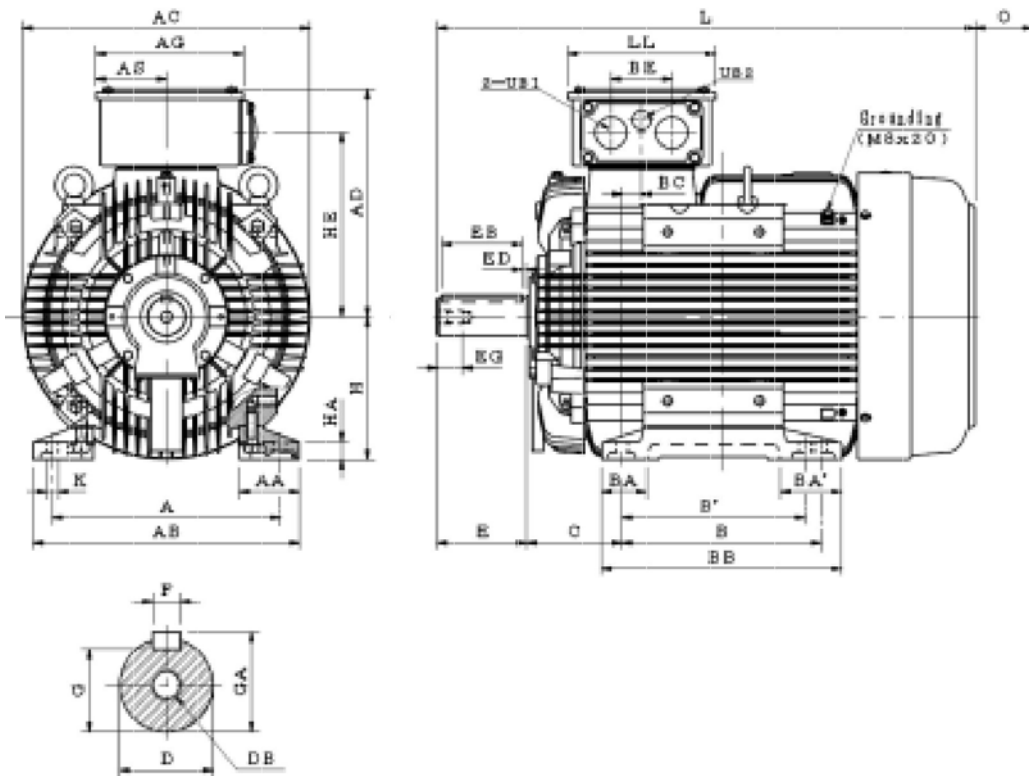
Outline drawing of cast iron design, feet version, mounting B3; frame size 200 - 250 (sample)
